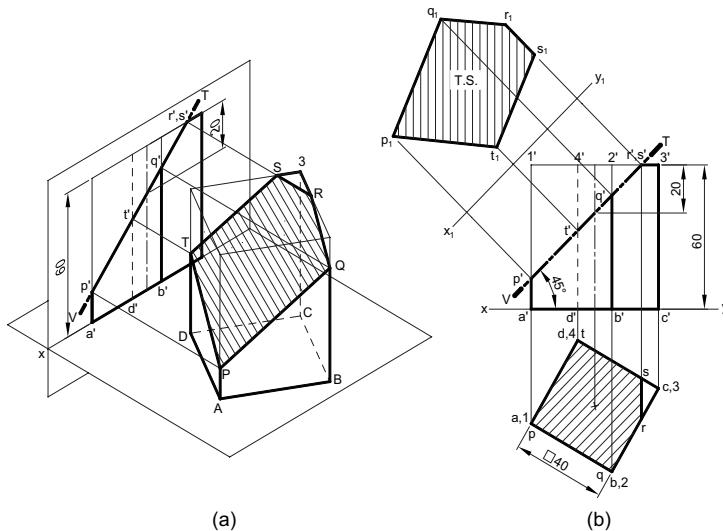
Section of prism by A.I.P. (a) Pictorial view (b) Orthographic view
